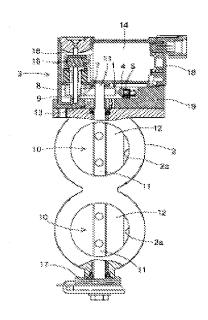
Side view of the self-holding mechanism, valves of which are fully closed, installed on the edge of the valve axis 11 of the swirl control valve 10.
